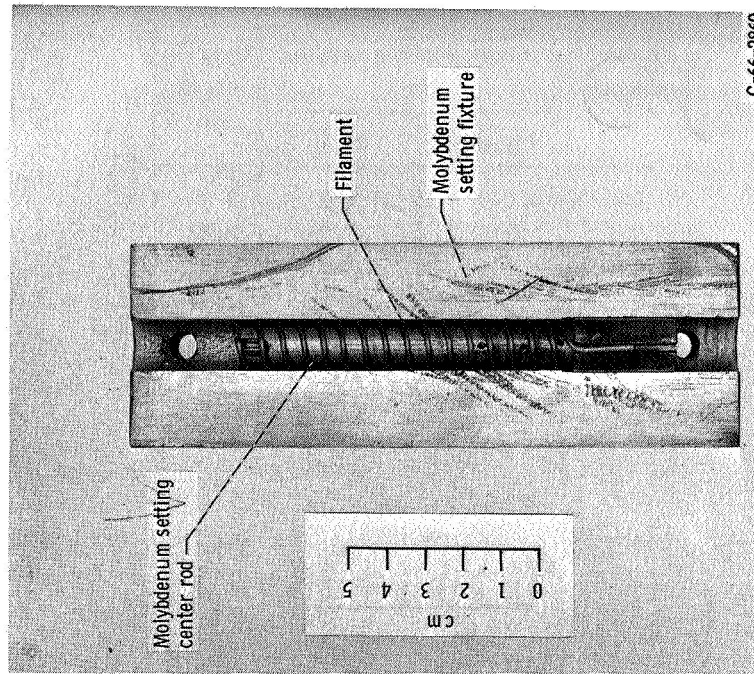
Molybdenum helical filament setting fixture with filament in place.
